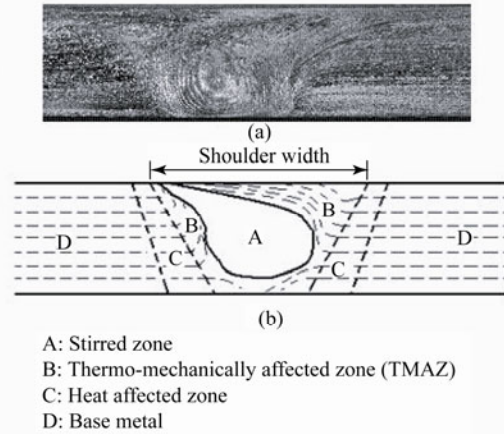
(a) Macro-sections of a FS weld; (b) schematic of a FS weld
